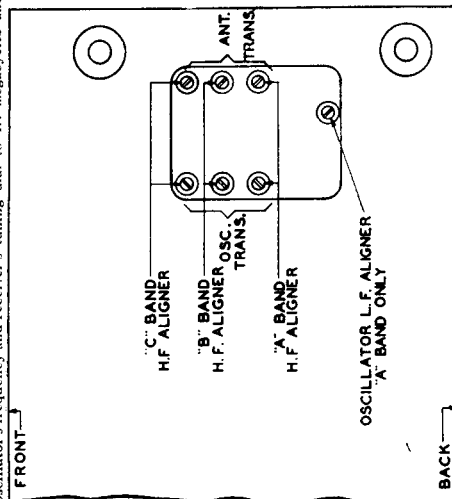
View Through Chassis Mounting Shelf Showing Adjusting Screws for H. F. Aligning Capacitors.
